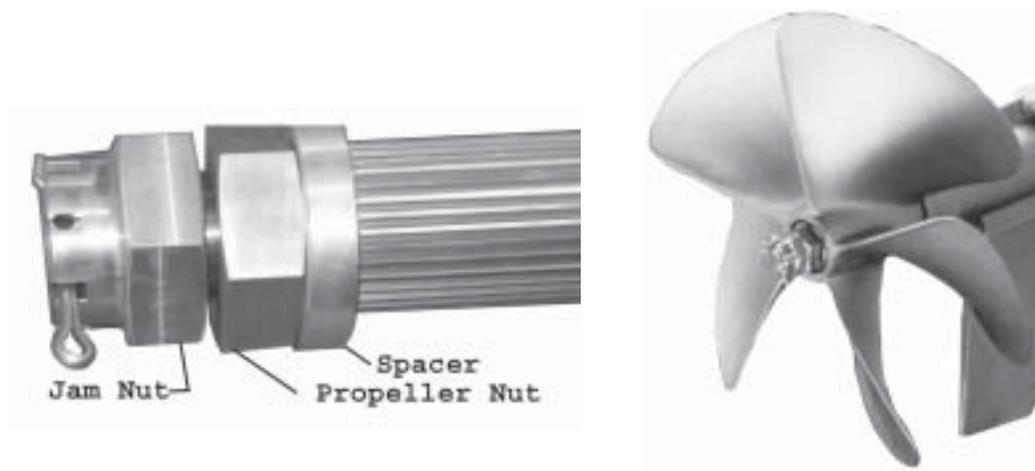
Propeller Retaining Parts (left), and Propeller Installed (right)
